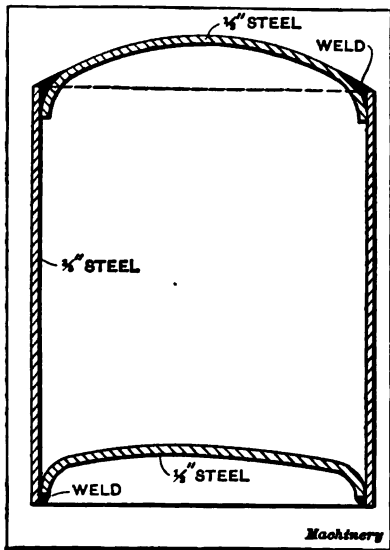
Example of Tank welded by the Oxy-acetylene Process
